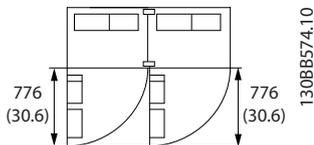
Front Clearance of IP21/IP54 Enclosure Type, Frame Size F10
